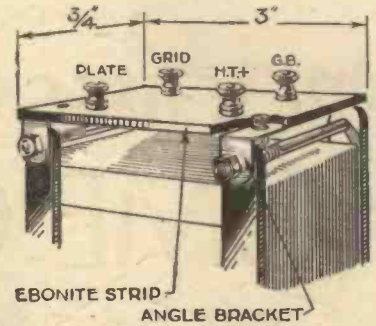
Details of the terminal platform for the L.F. transformer.
